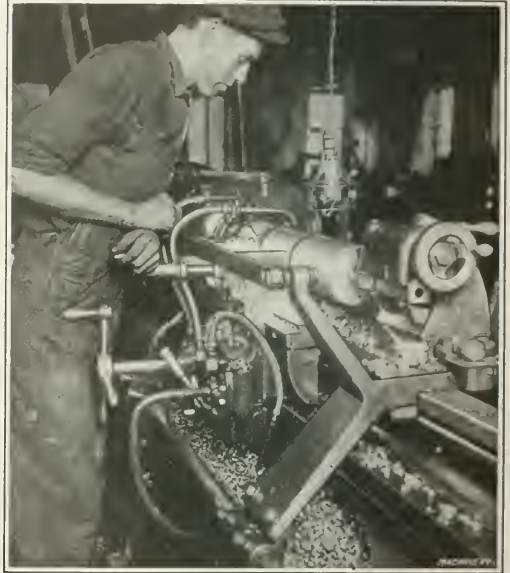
Rough-turning External Diameter in a "Lo-swing" Lathe
